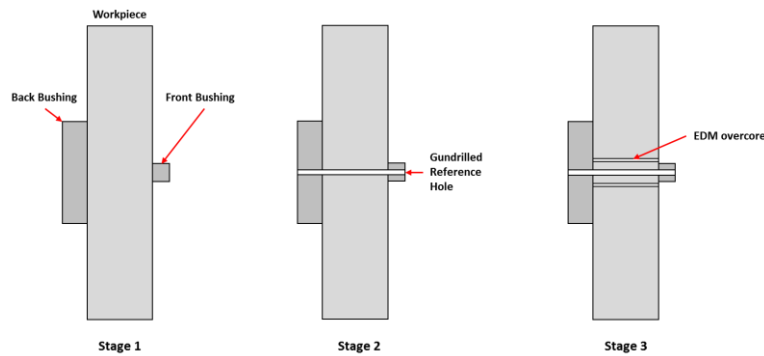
Schematic representation of the physical steps involved in a deep hole drilling measurement. First, bushings are attached on either side of the workpiece, then a precisely define hole is drilled through the workpiece and its diameter characterized along its length. Finally, an EDM over-core is performed, releasing the aforementioned hole from the structure. The resulting dimensional changes of the hole are then used to calculate the pre-existing residual stress state.
